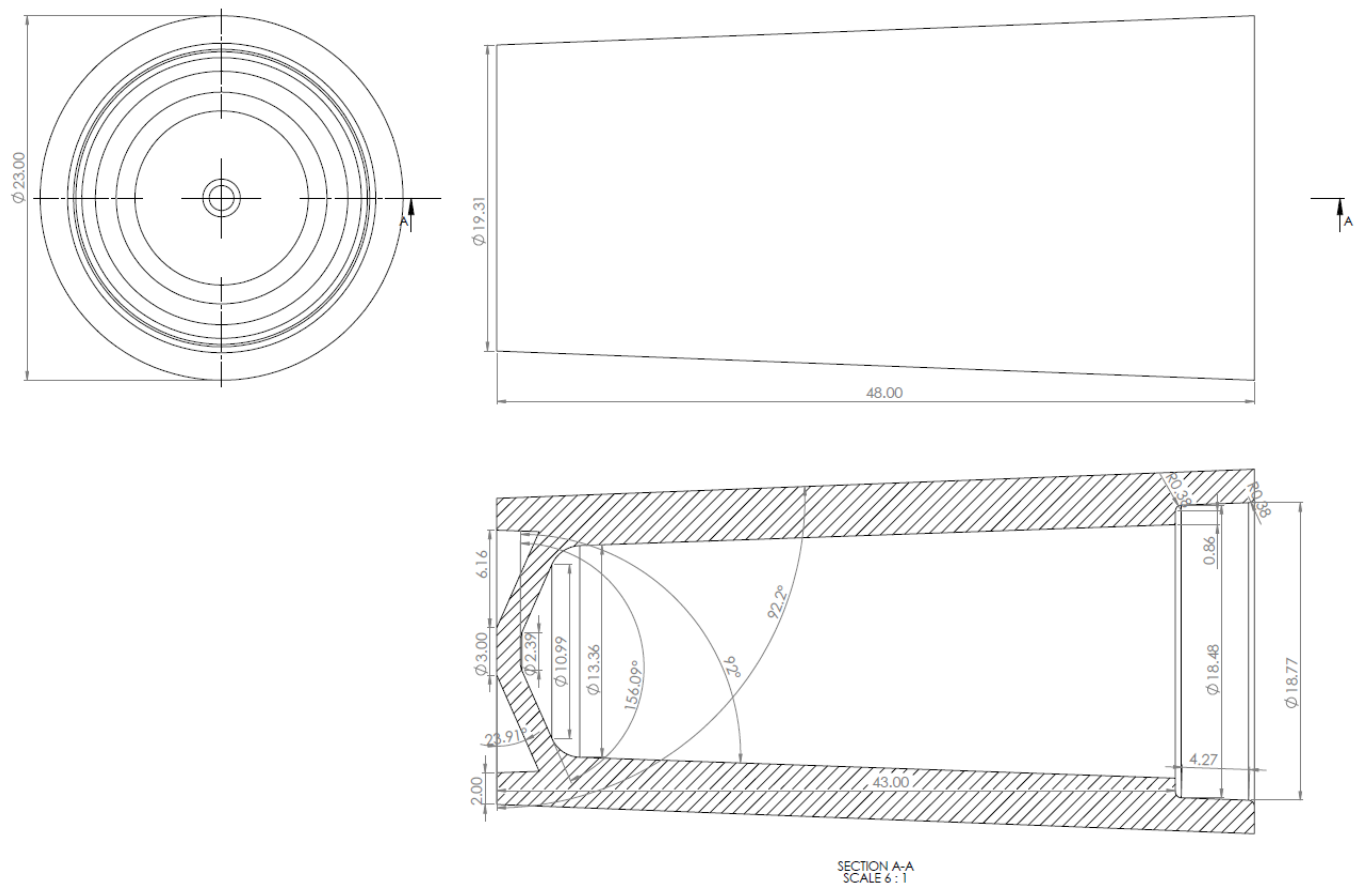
Engineering drawings of the homeRNAmix components. All dimensions are in millimeters.
